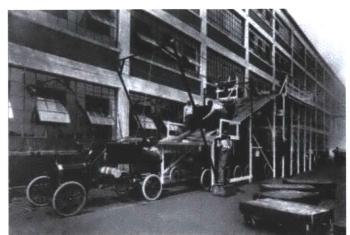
Experimental assembly lines at Ford Motor Company, 1913.
